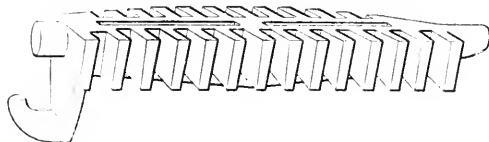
REAR GRATE BAR, SHOWING STRONG TRUSSED CONSTRUCTION.
